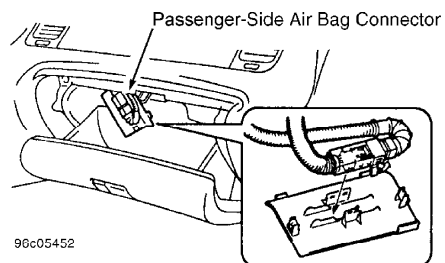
Disconnecting Passenger-Side Air Bag Connector
